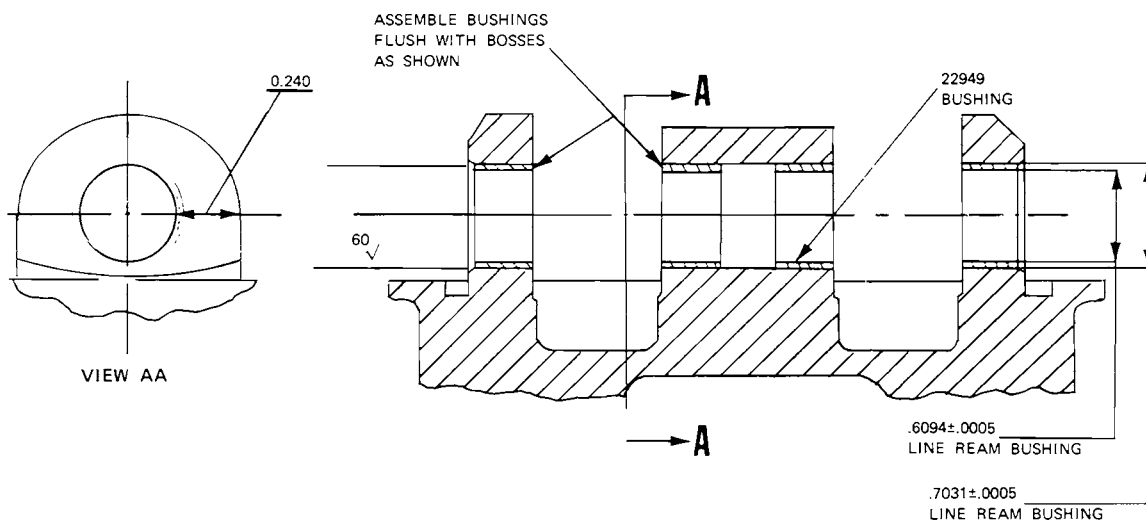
Dimensions of Rocker Shaft Boss Bushings.
